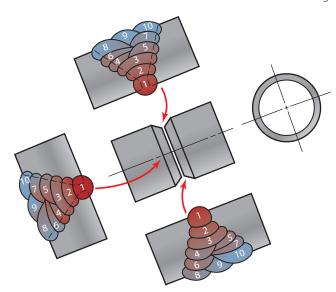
Weld bead positions for 6G pipe weld.
